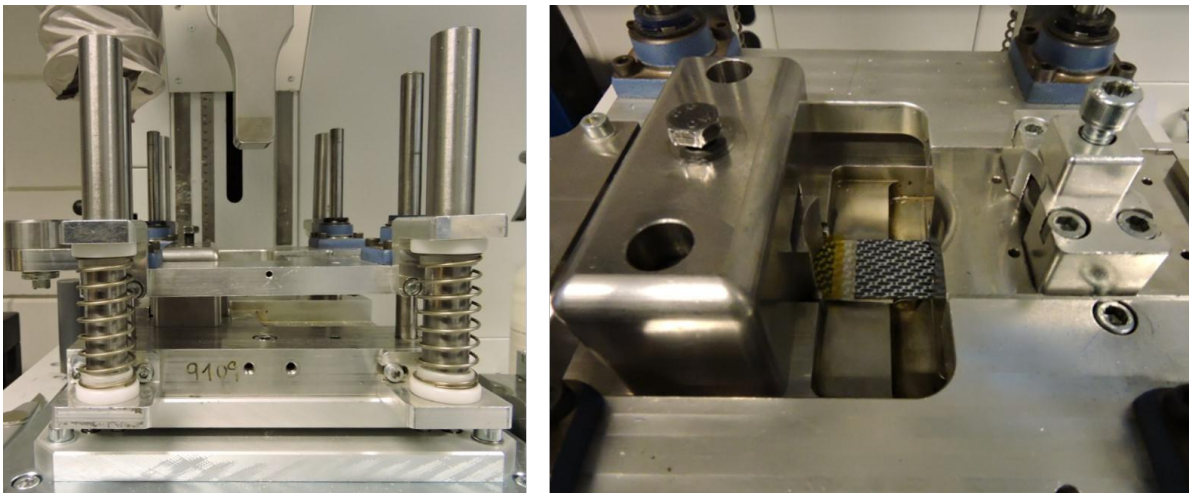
The welding fixture used for making the spot welds (left) and the loading of the specimen (right)
